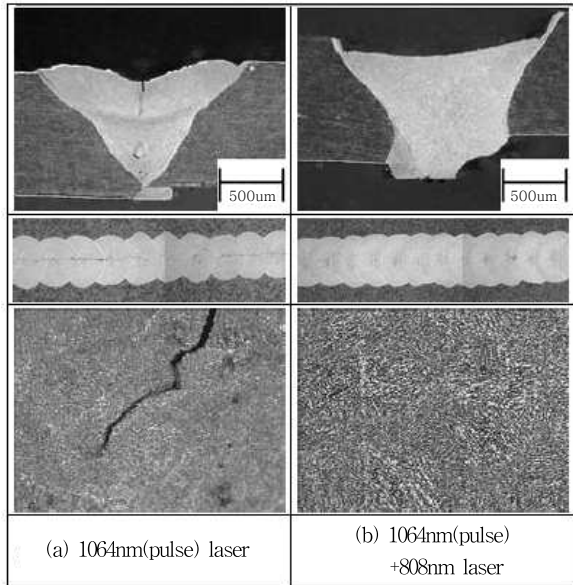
Cross section & weldment of pulse laser and pulse+diode laser
